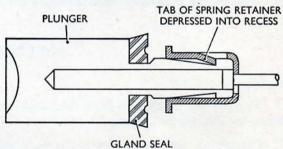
Sectioned view of master cylinder plunger and spring retainer
